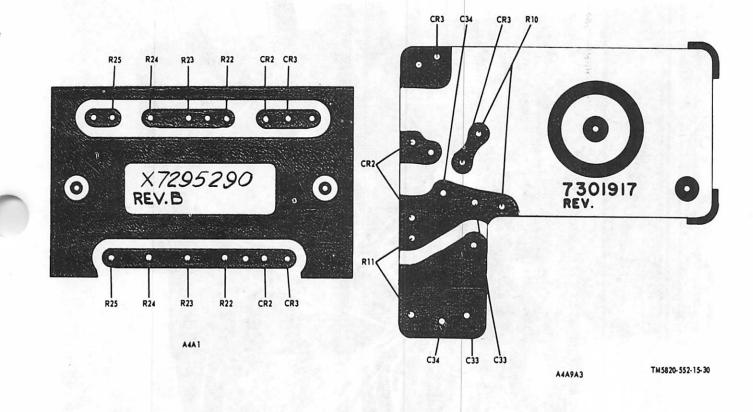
Component terminal locations, antenna indicator assembly A4A1, and oscillator control assembly A4A9AS.
